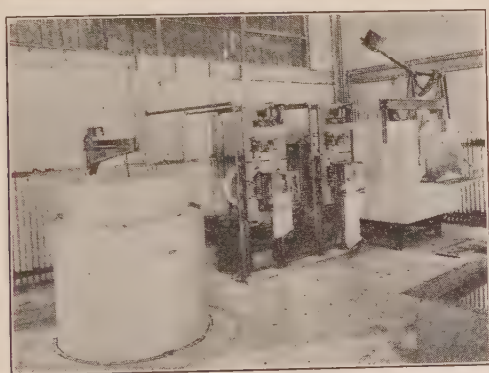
ELECTRIC TOOL-HARDENING FURNACES
